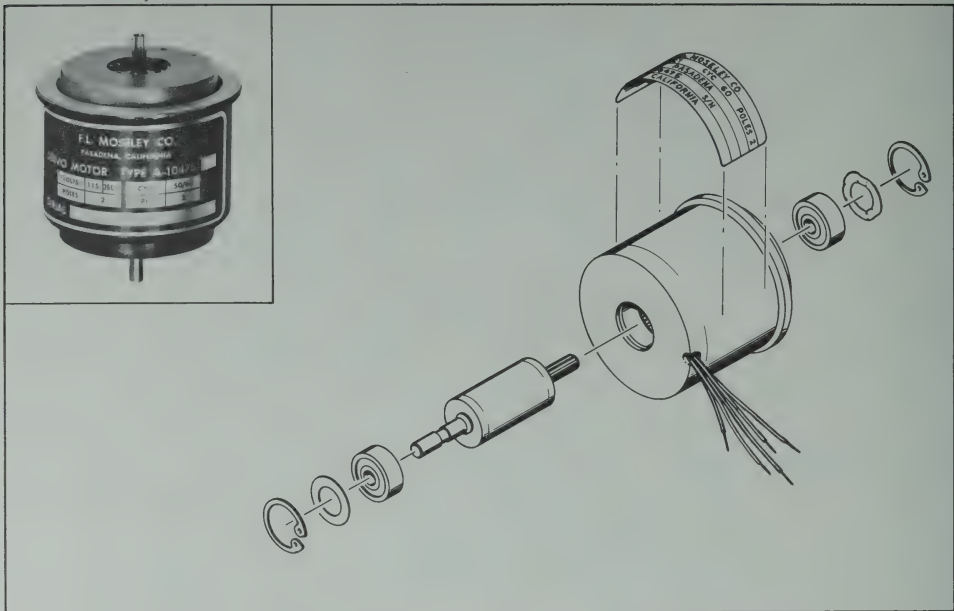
SERVO MOTOR ILLUSTRATION
